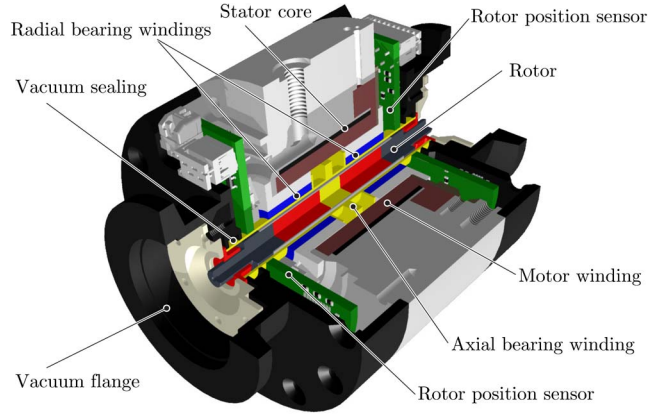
Sectional view of the high-speed self-bearing machine prototype.
